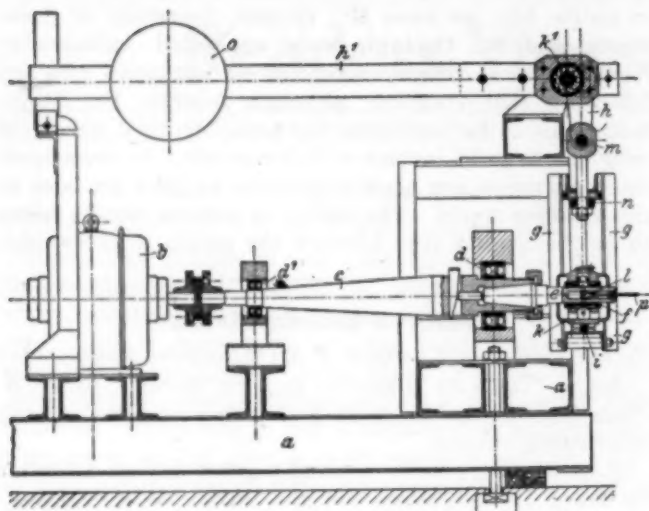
KAMMERER'S TEST BENCH FOR JOURNAL BEARINGS
